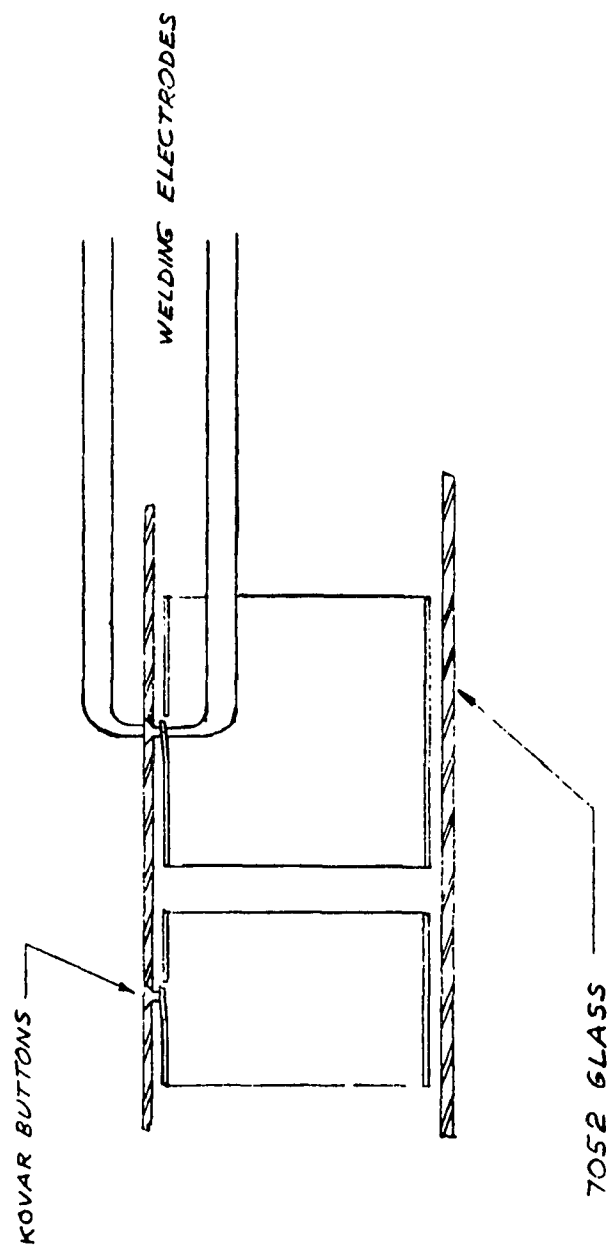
Sketch showing the welding of Kovar buttons.
